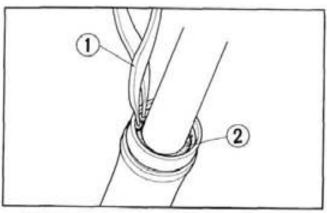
① 48 mm internal snap ring ② dust seal
